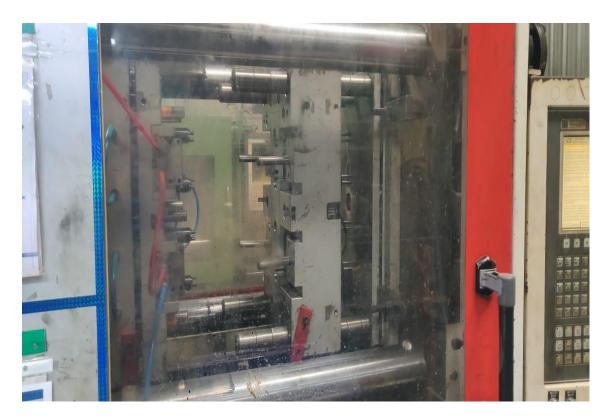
Injection Moulding Machine in NR Tech Poly Plast LLP.
